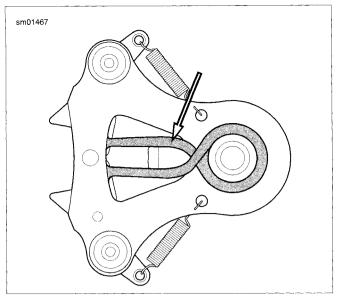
, Shifter Shaft Return Spring (Correctly Installed)
